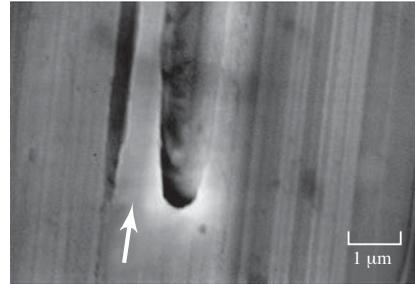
Deep scratch on machined surface caused by a broken beryllide. The arrow shows tool cutting direction.
